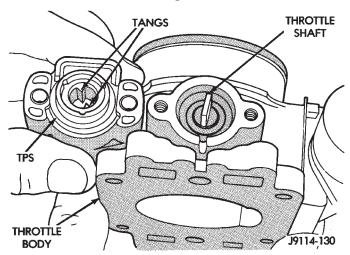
Throttle Position Sensor Installation—4.0L Engine
